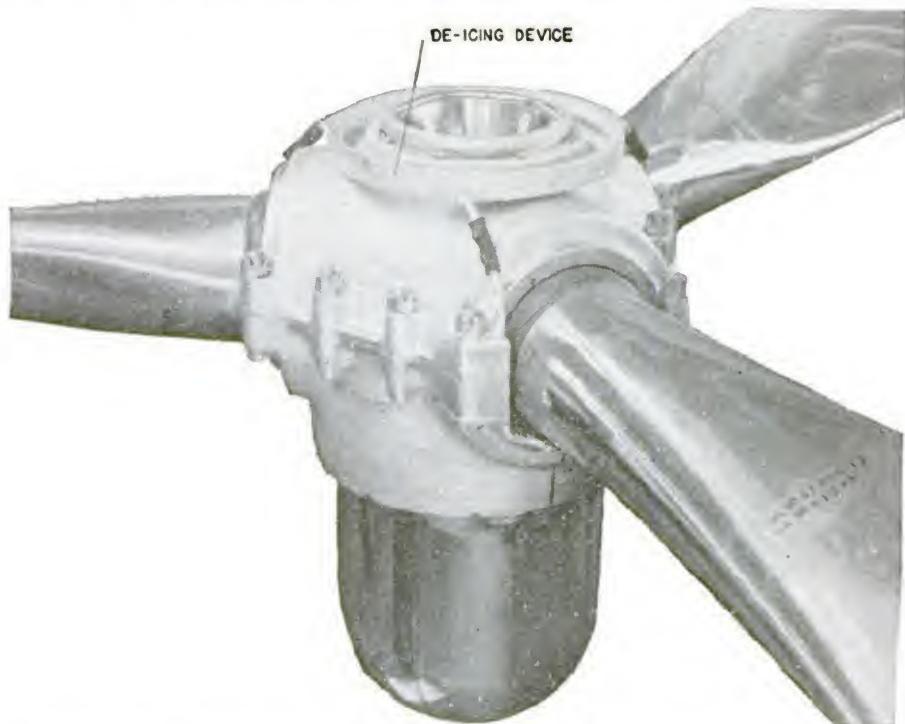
Slinger ring type de-icing device installed on hydromatic propeller.
